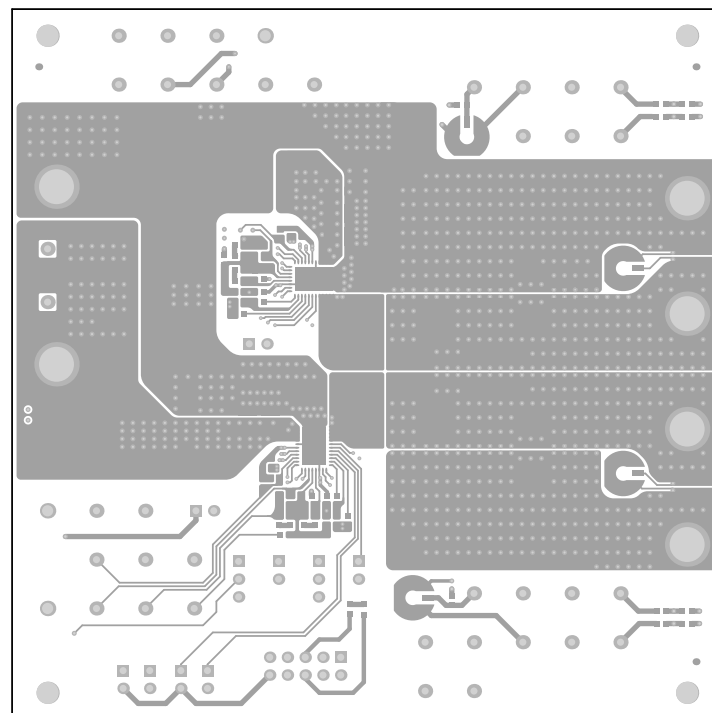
TPS546C20AEVM1-746 EVM Top Copper (Top View)
